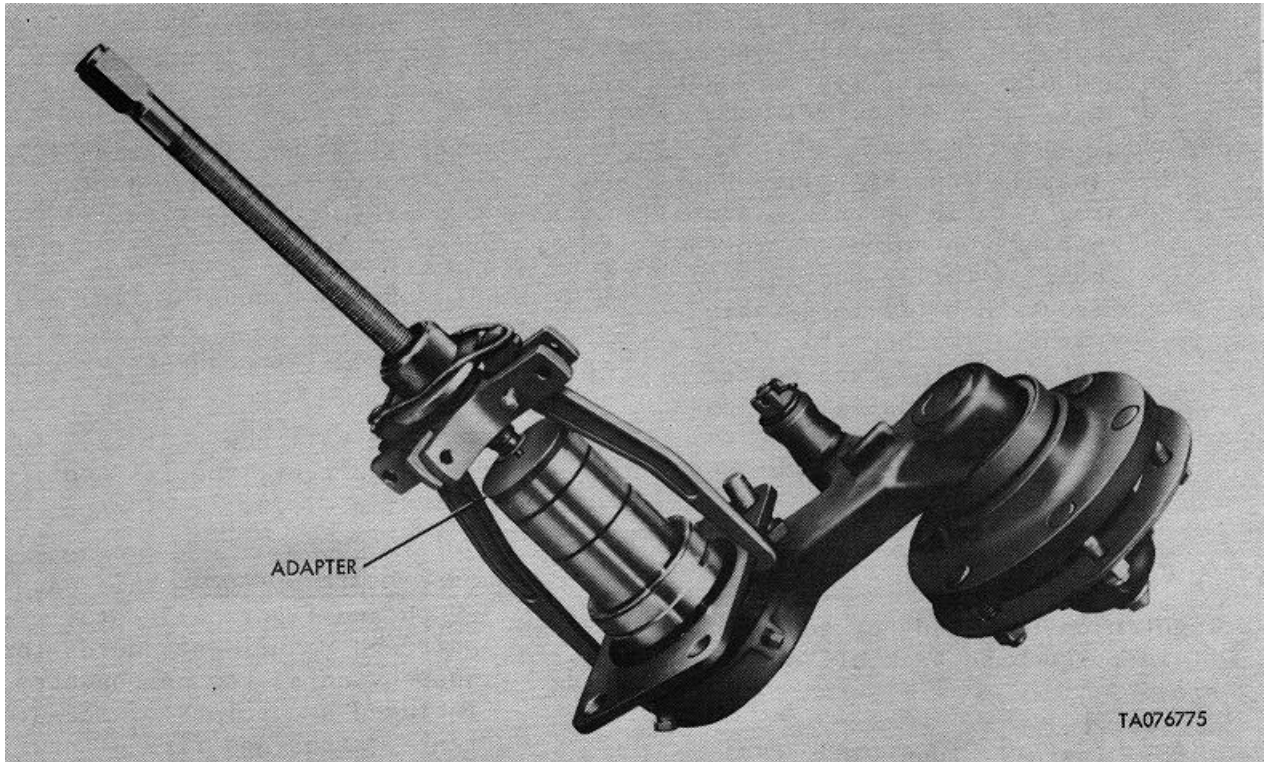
Trunnion - Plate and Needle Bearings Removal Using Puller with Adapter
